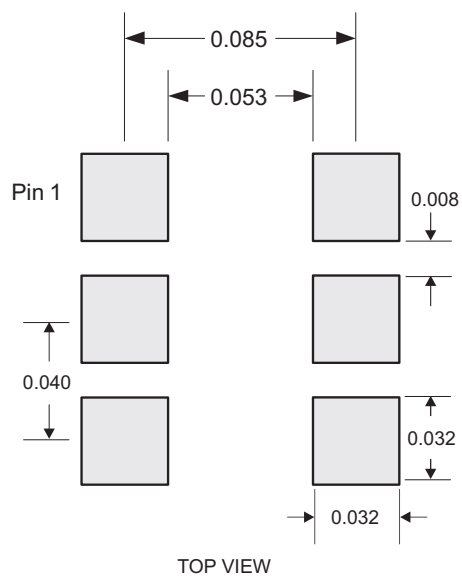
THS9000 Recommended Footprint dimensions are in inches (millimeters)
